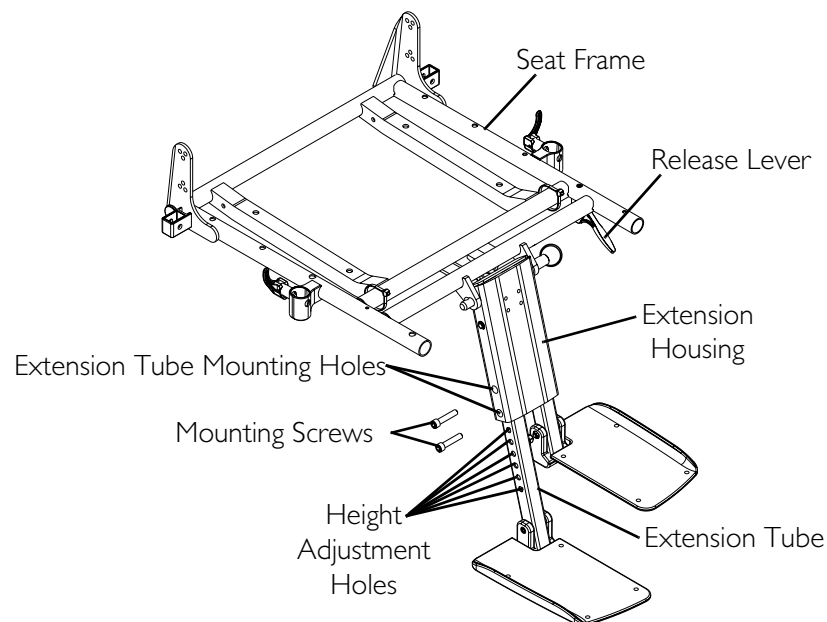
Adjusting the Height of the Center Mount Footrest
